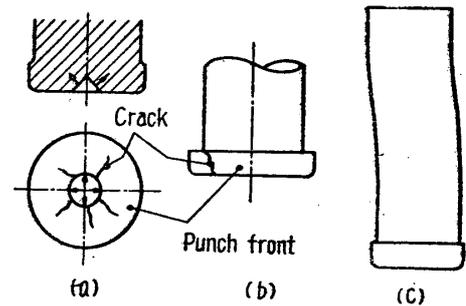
Various Types of Punch Failure: (a) radial cracking around centre hole on punch front, (b) breakage of projected thin punch front, (c) buckling failure of punch body.
